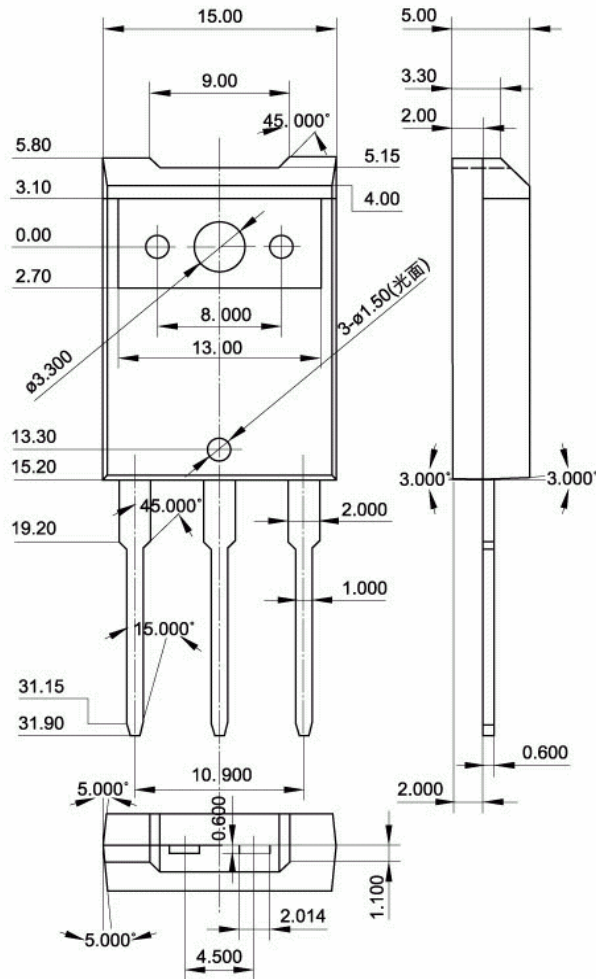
Outline dimensions (unindicated tolerance:±0.30mm)
